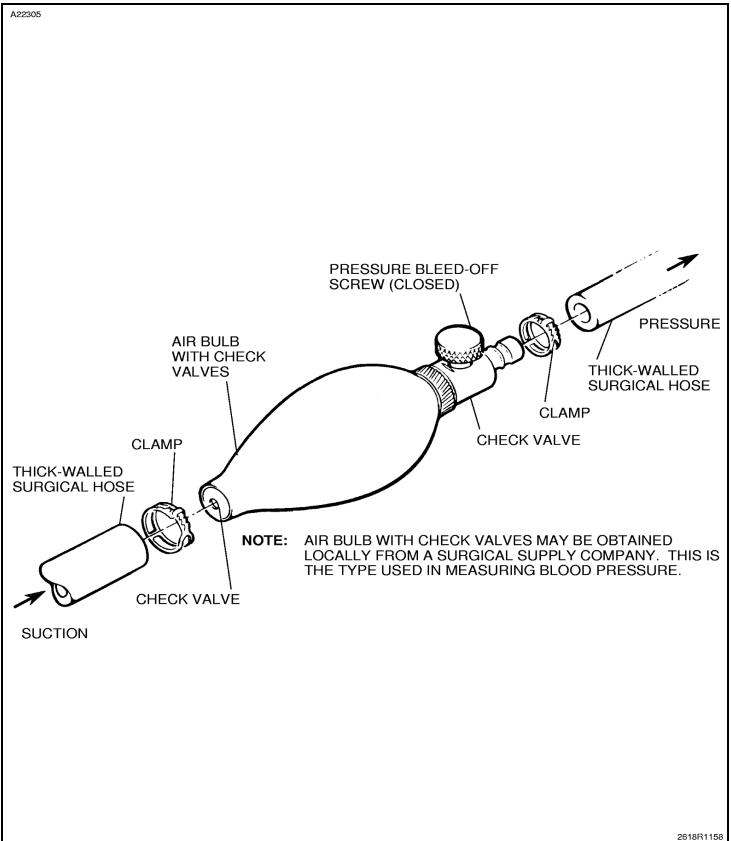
Sheet 1 : Static System Test Equipment Fabrication
